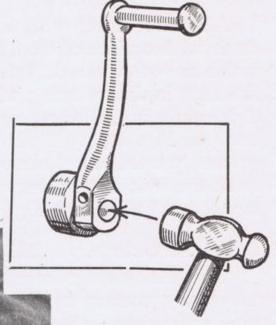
To KICK-STARTER CRANK. Tapping the end of the shaft to free the crank.
